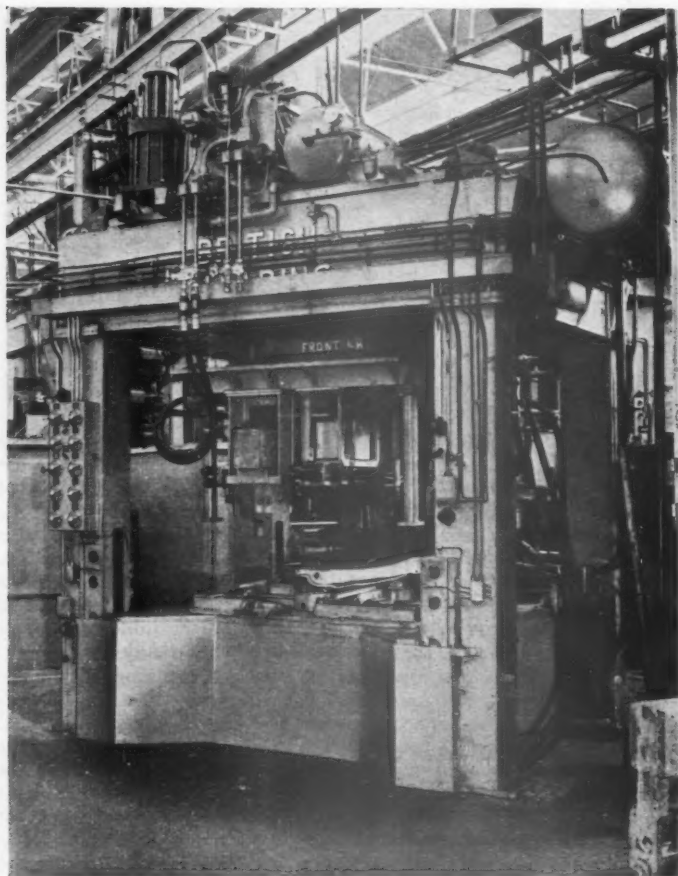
Four pillar type press welder (Vauxhall Motors).
